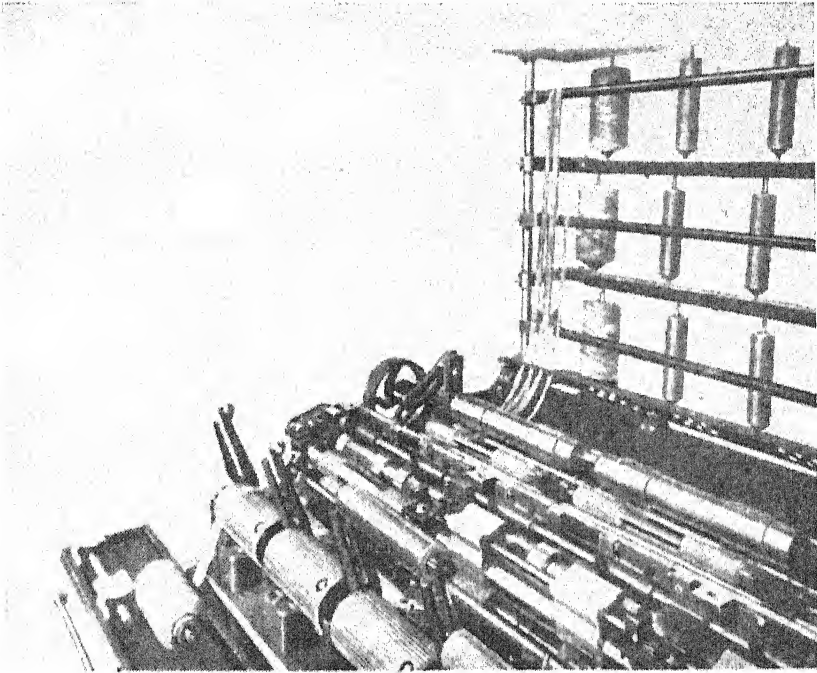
Close up view of a Porcupine Drawing Box, showing passage of sliver through the machine.
